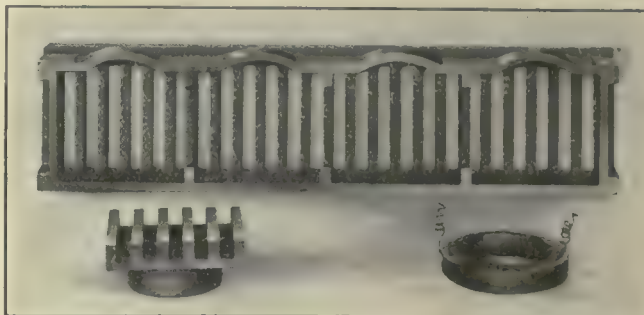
THE INDIVIDUAL PARTS OF A CHUCK UNIT
